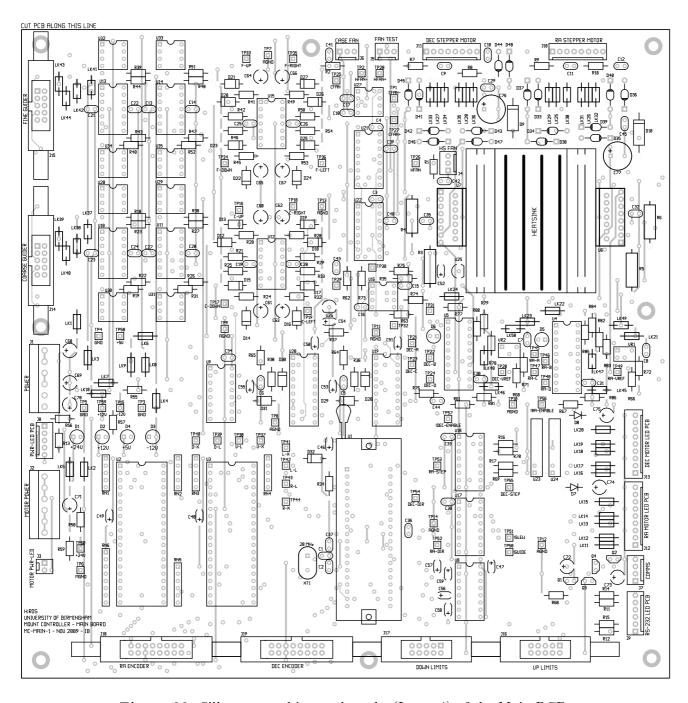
Silkscreen and internal tracks (Layer 4) of the Main PCB.
